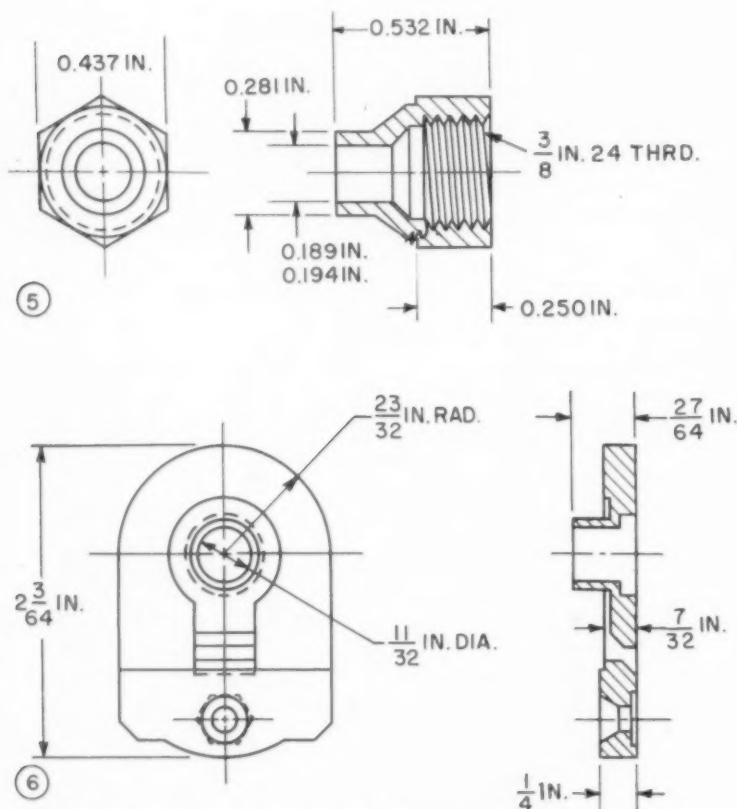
Dimensions of flare nut used in comparison of molding cycles and shrinkage. FIG. 6: Dimensions of bearing block used in comparison of molding cycles and shrinkage.
